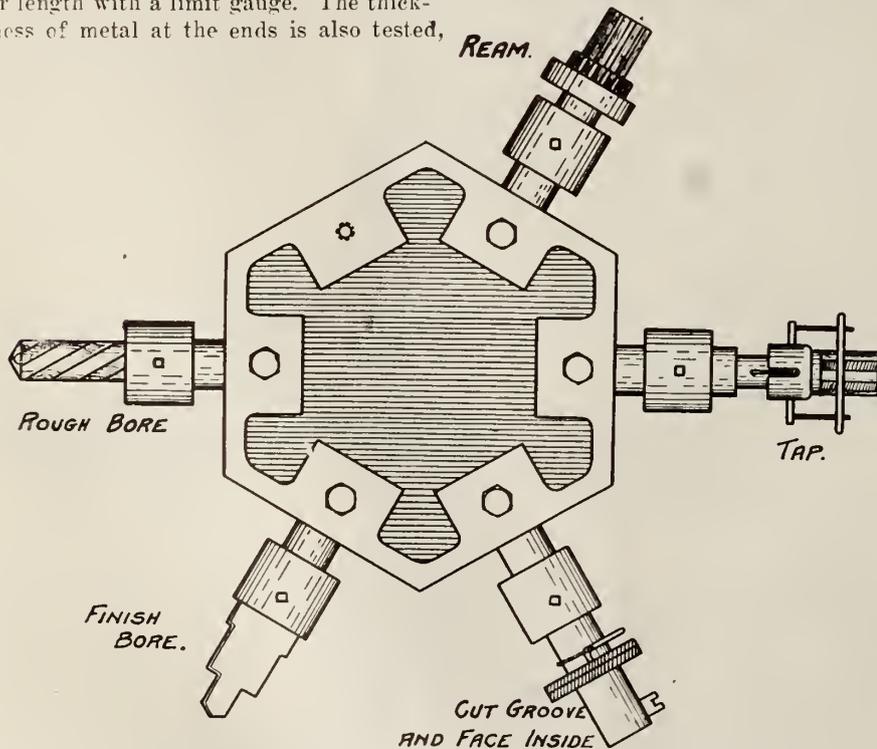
TOOLS CARRIED ON THE WARNER & SWASEY TURRET.
